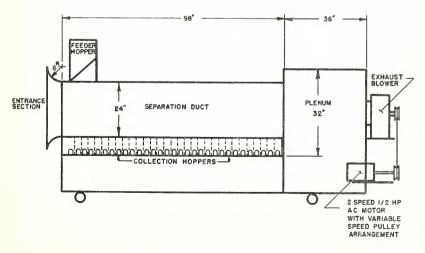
A SCHEMATIC DRAWING OF THE SEPARATOR
